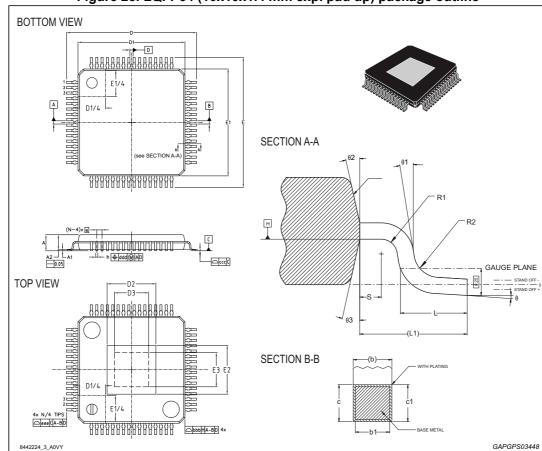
LQFP64 (10x10x1.4 mm exp. pad up) package outline
